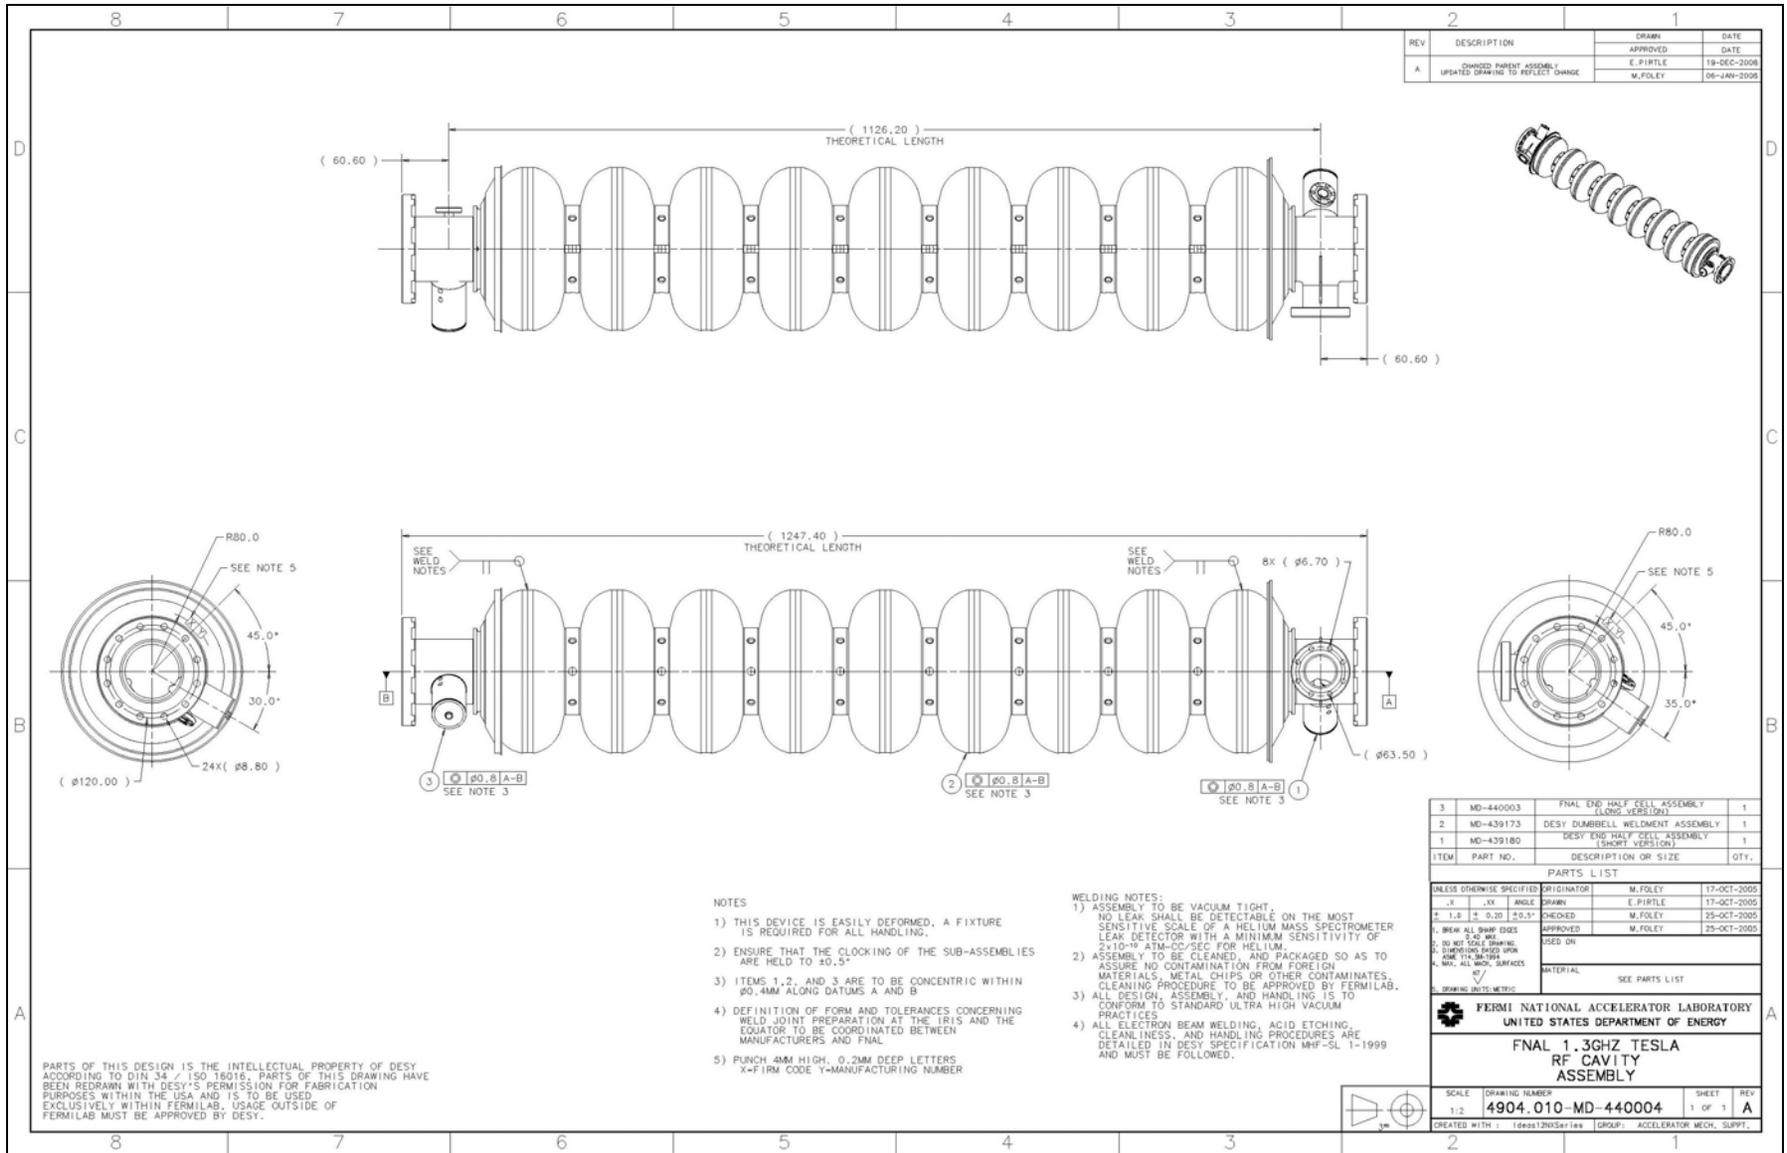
1.3-GHz Nine Cell RF Cavity Assembly (4904.010-MD-440004)
